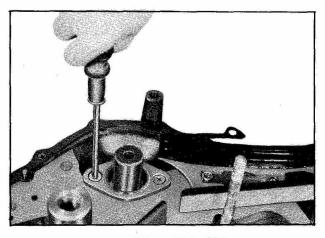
Replacement of Jackshaft is a reversal of the above procedure.
